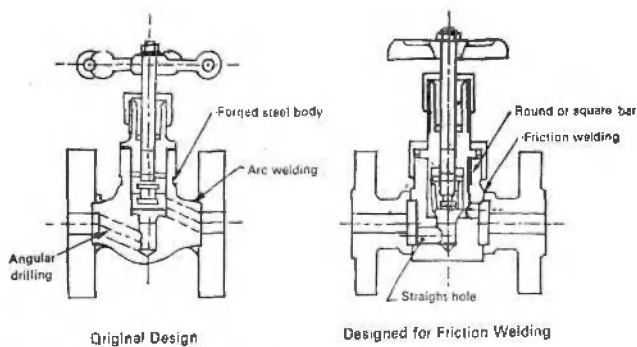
Friction welding of stop valve. The forged body was replaced by a round or square bar, angular drilling was avoided and standardization was achieved, the same body could be used for flange type, union nut type, tapered screen type etc.
